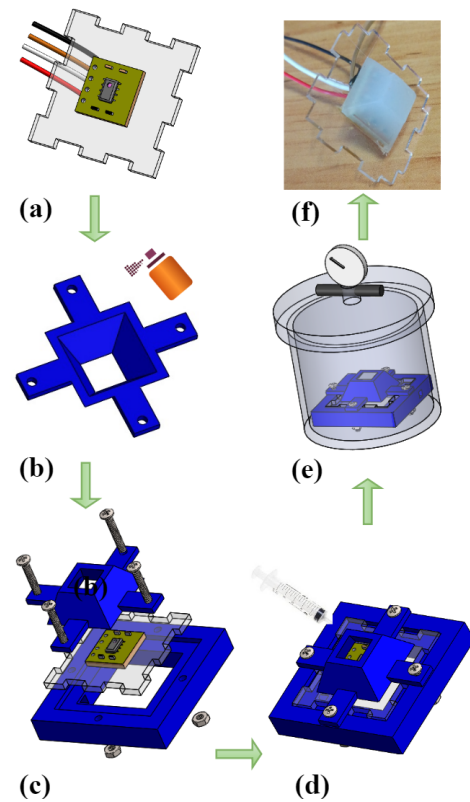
Schematic of the casting process:(a) Paste the pcb onto the plexiglass sheet by double-glue, (b) Spray top of mold for easy silicone separation, (c) Insert the sensor into the mold, (d) Inject silicone rubber, (e)Insert the mold in a vacuum chamber and degassing proces, (d) completed tactile module.
